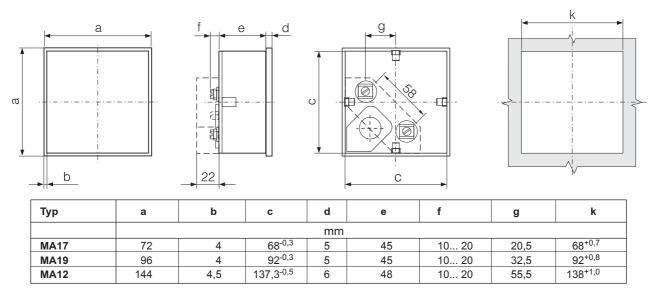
External dimensions of MA17, MA19 and MA12 meters
